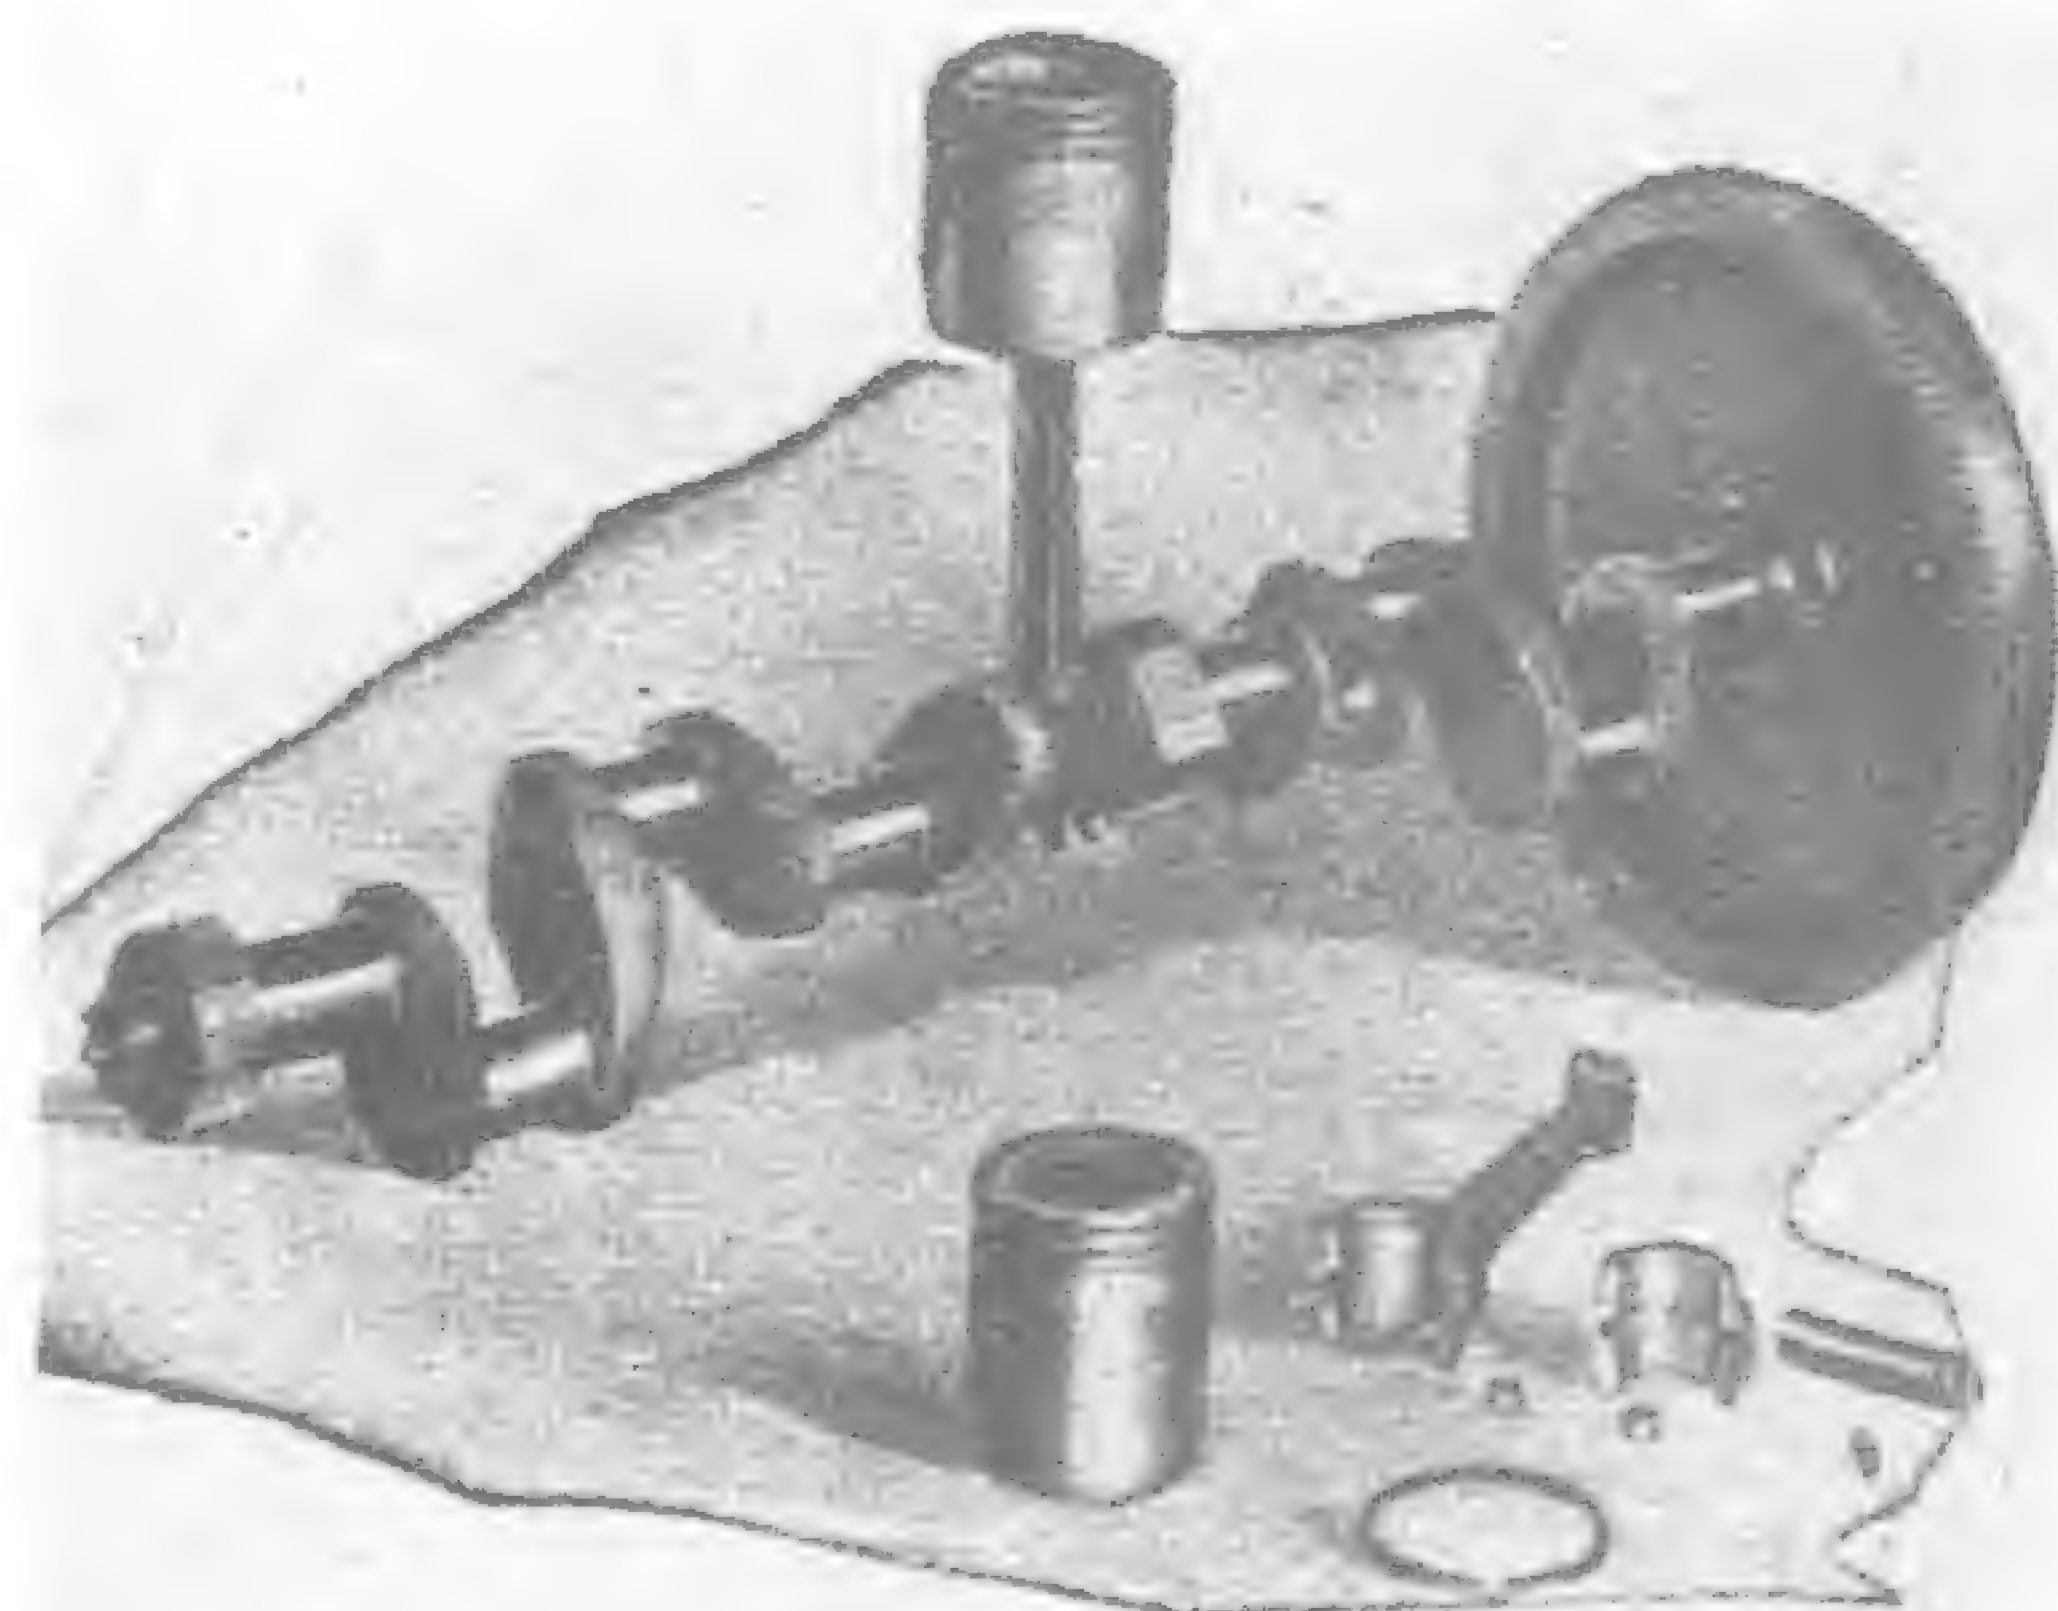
Crankshaft Fly Wheel and Piston Assembly. Crankshaft, Connecting Rod and Piston Pin are of Nickel Alloy Steel
